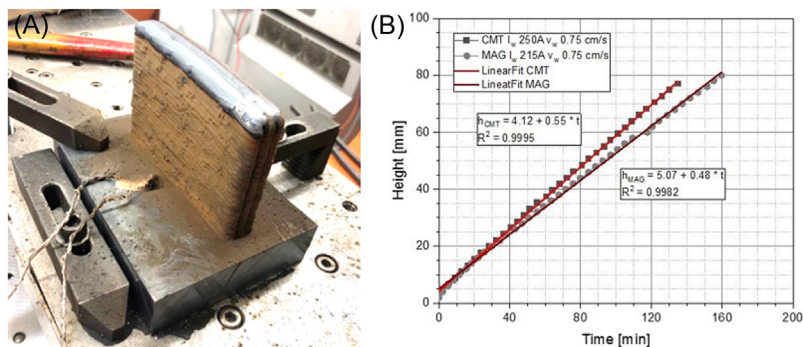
Comparison of build-up rate of CMT vs. GMAW for WAAM of hot work tool steel; interpass strategy: 350°C–400°C interpass temperature before welding the subsequent layer (A) AM test geometry with 3 welding tracks per layer and a minimum AM component height of 80 mm, (B) build-up rate for deposition of AM structure with CMT 0.55 mm/min and GMAW 0.48 mm/min at similar material deposition rate (approx. 7.4 m/min).
